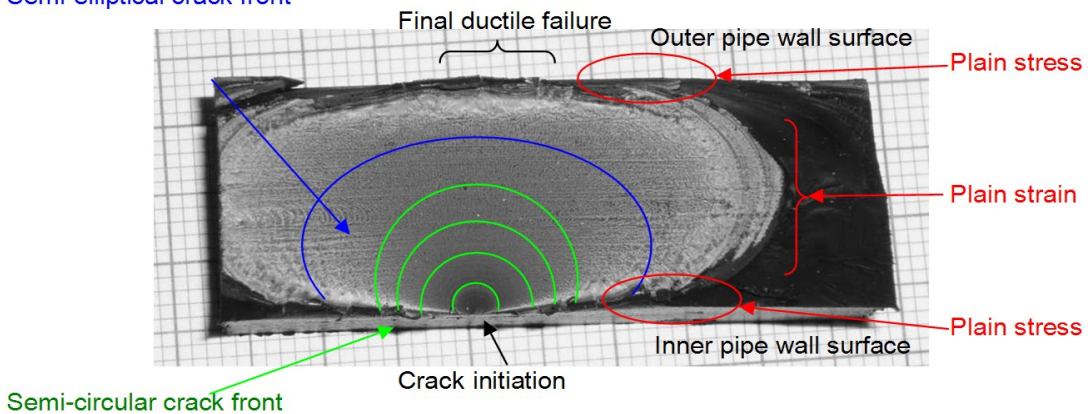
Fracture surface of an internal pressure test with a changing crack front shape from semi-circular to semi-elliptical [40].
